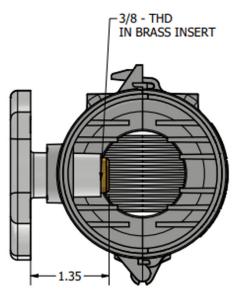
Handwheel General Dimensions. Units expressed in inches.
